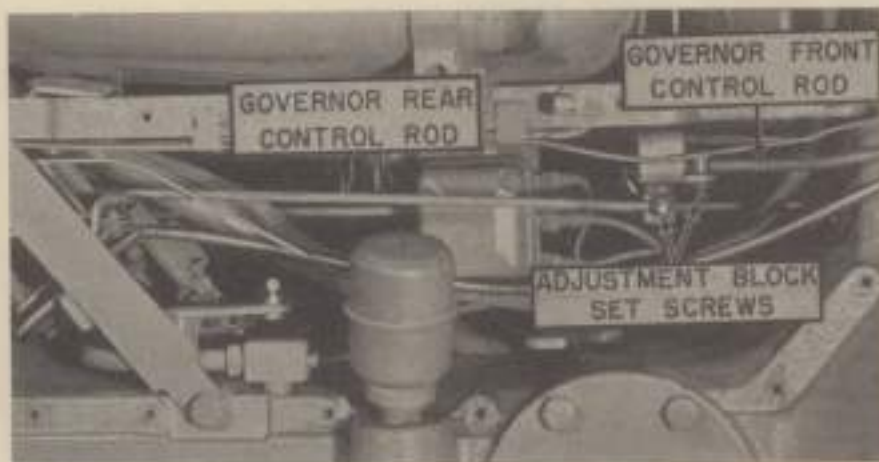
The D-17 non-diesel engine high idle speed is controlled by varying the lengths of the governor front and rear control rods. The rods can be moved either way, in their adjustment blocks, as required after the set screws are loosened. Control rods are similar as D-14 models.
